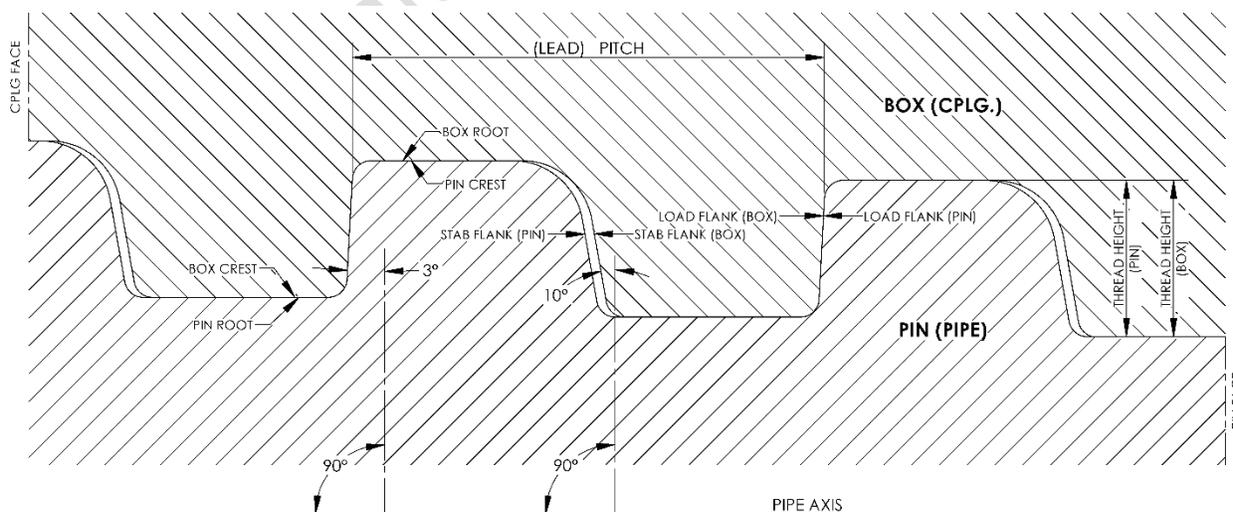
Buttress Thread Configuration for 16 in. OD and larger Casing
